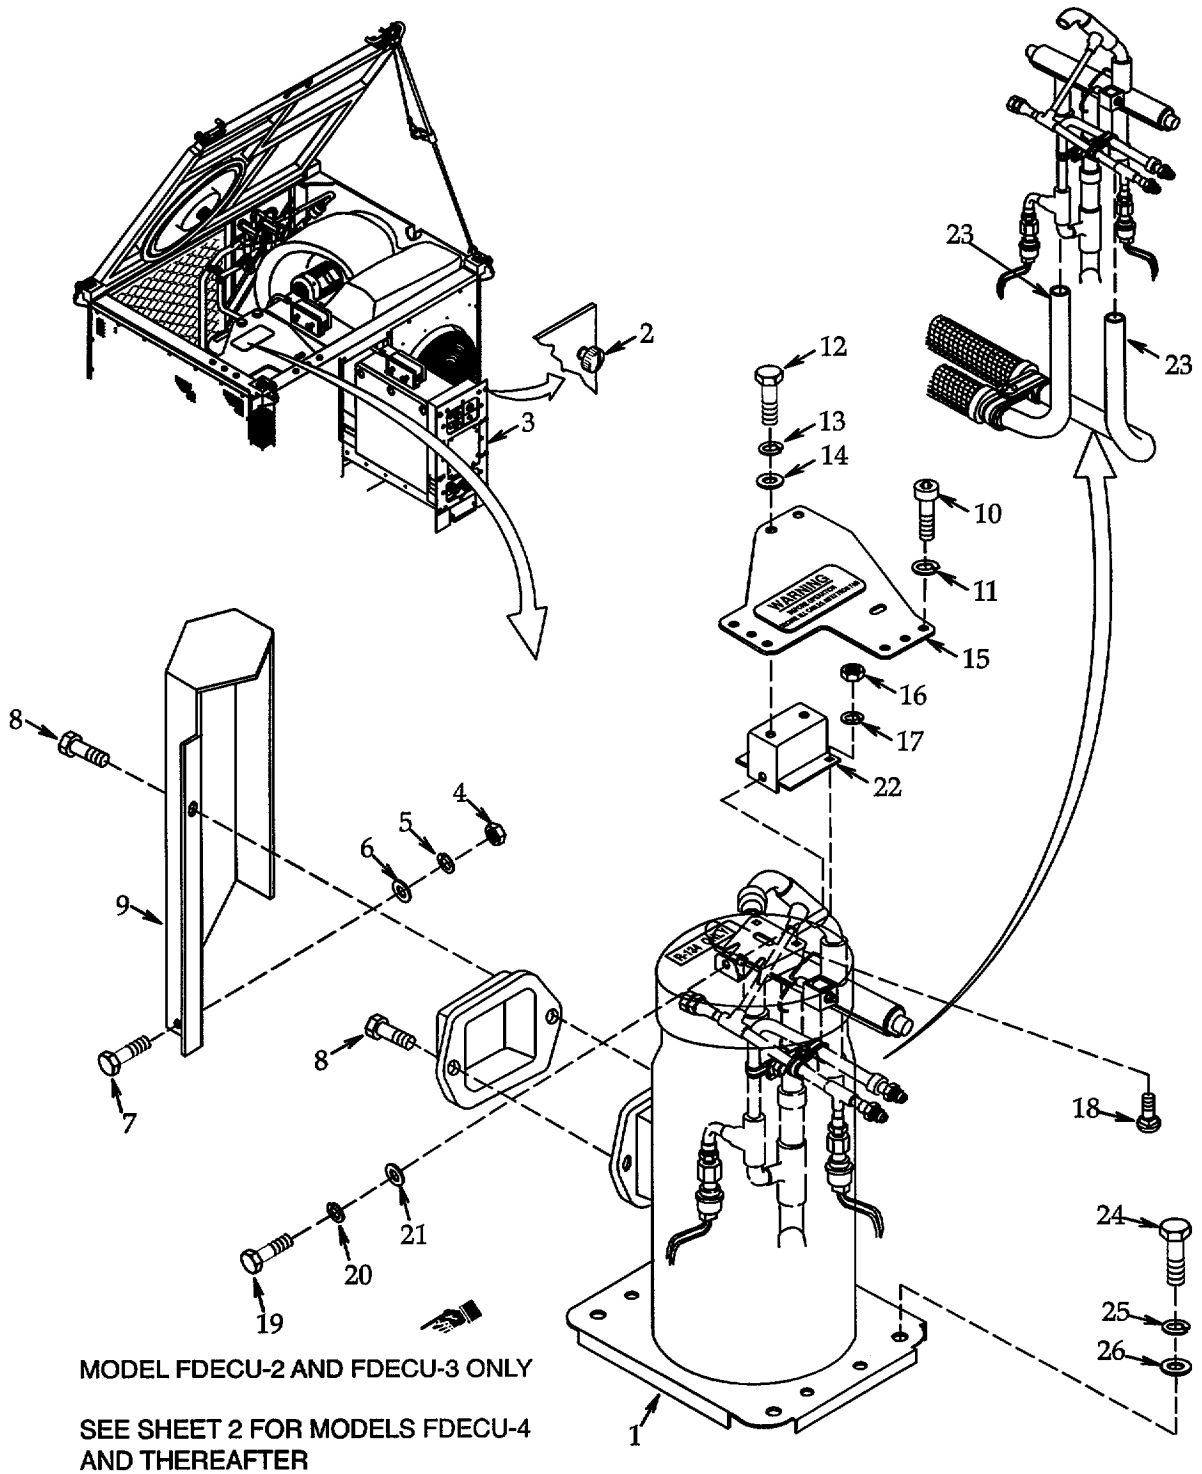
Compressor and Reversing Valve Assembly (Sheet 1 of 2).
